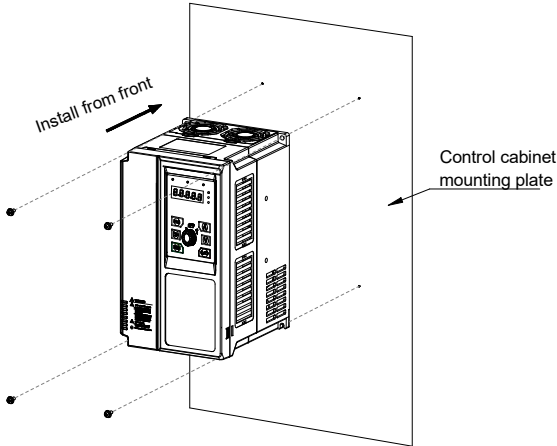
Wall-mounted Installation Diagram of Plastic Structure
